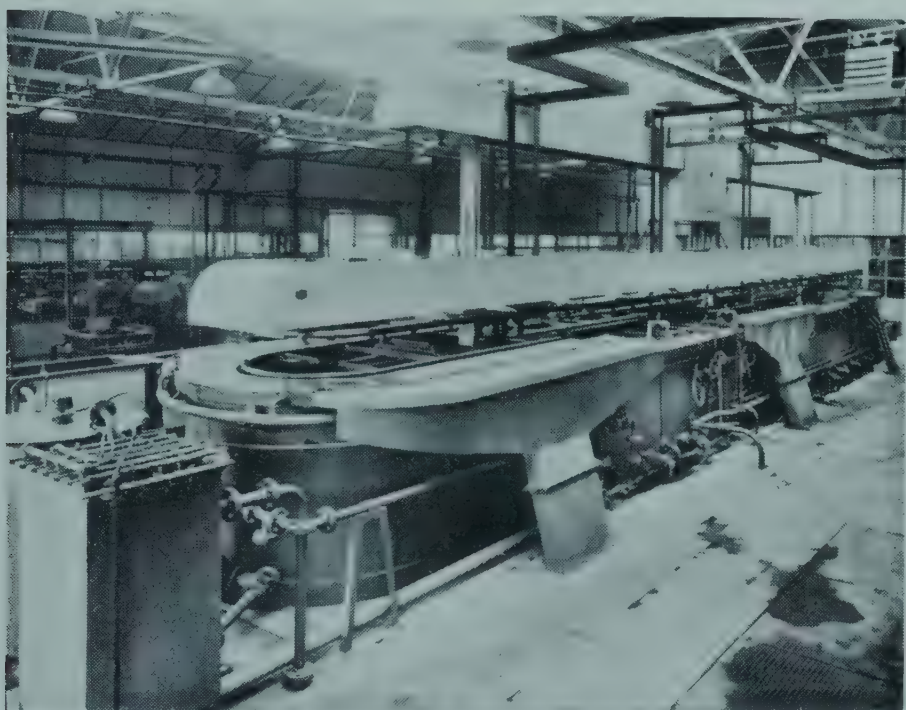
Automatic plating showing arrangement of exhaust ducting
